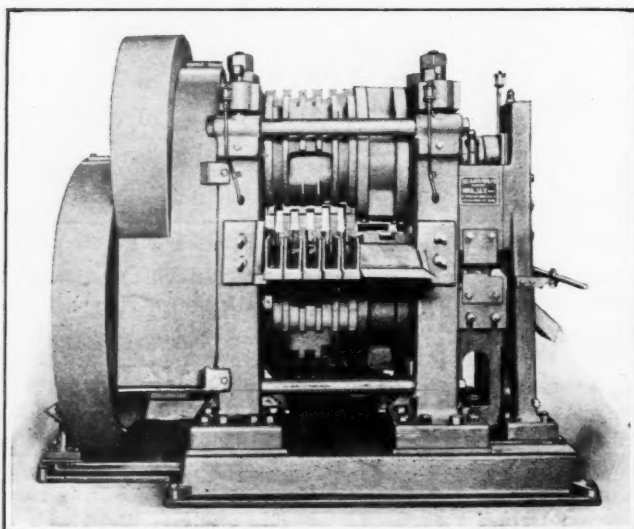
Machine for forging Brake Levers for Railway Cars and Other Heavy Flat Tapered Work
